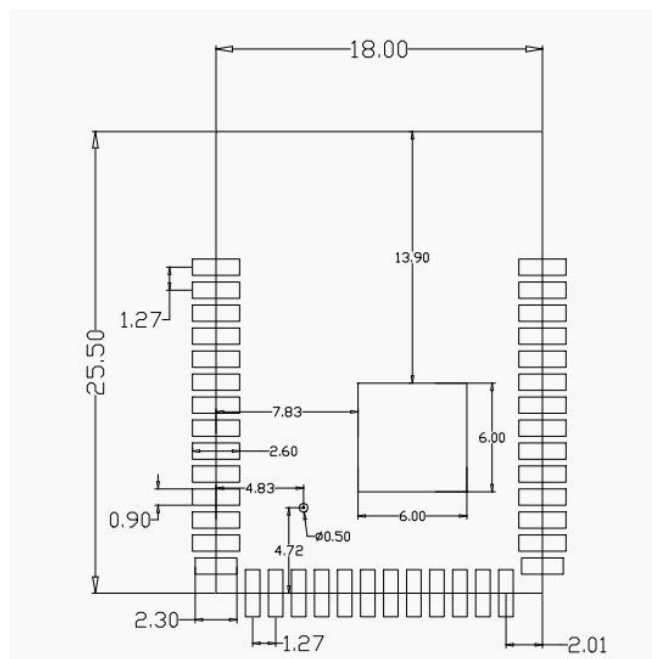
Recommended PCB Footprint Dimensions (Unit: mm)
